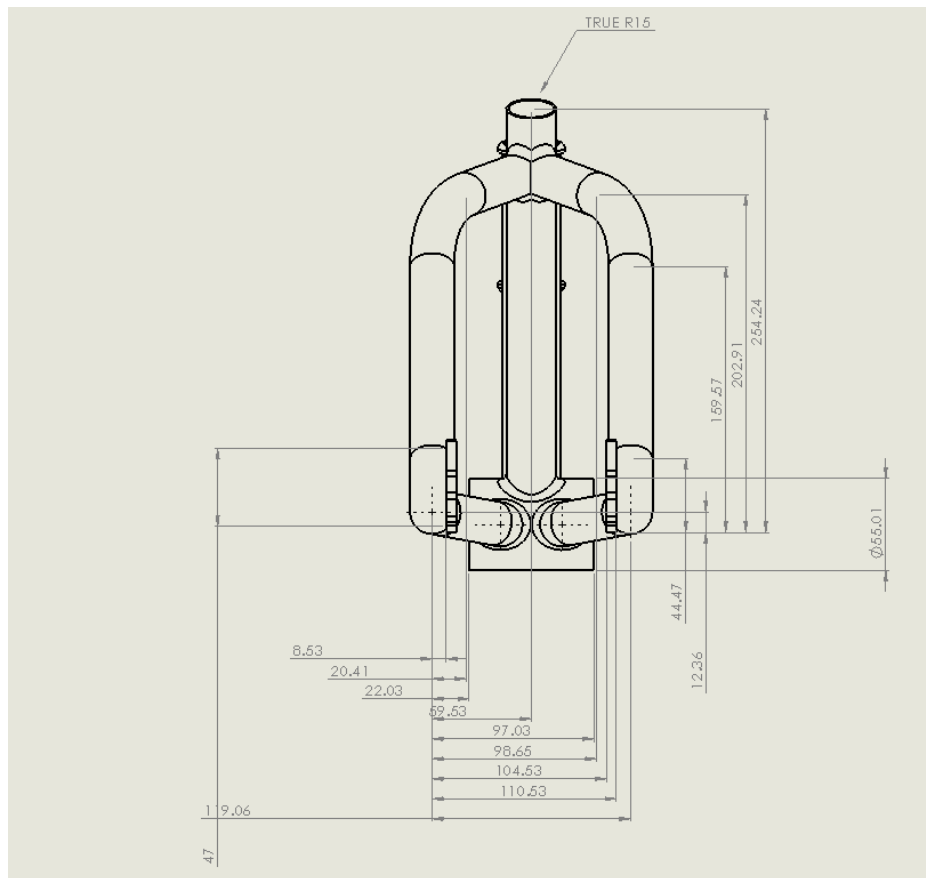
Dimensions of the frame in the back view (all dimensions in mm)
